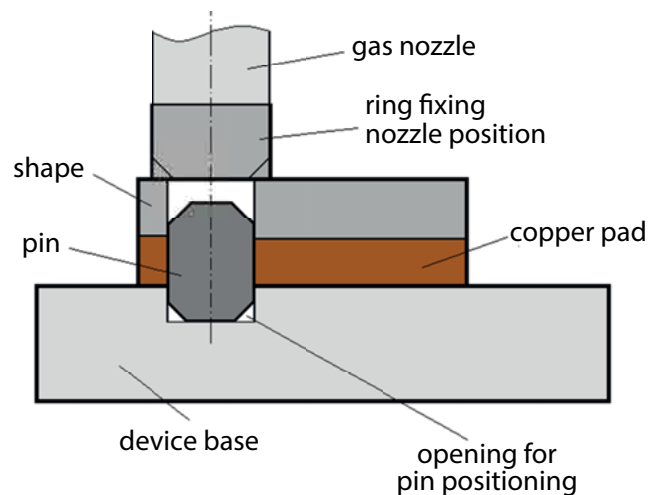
Scheme of instrumentation for spot welding of hinge elements
